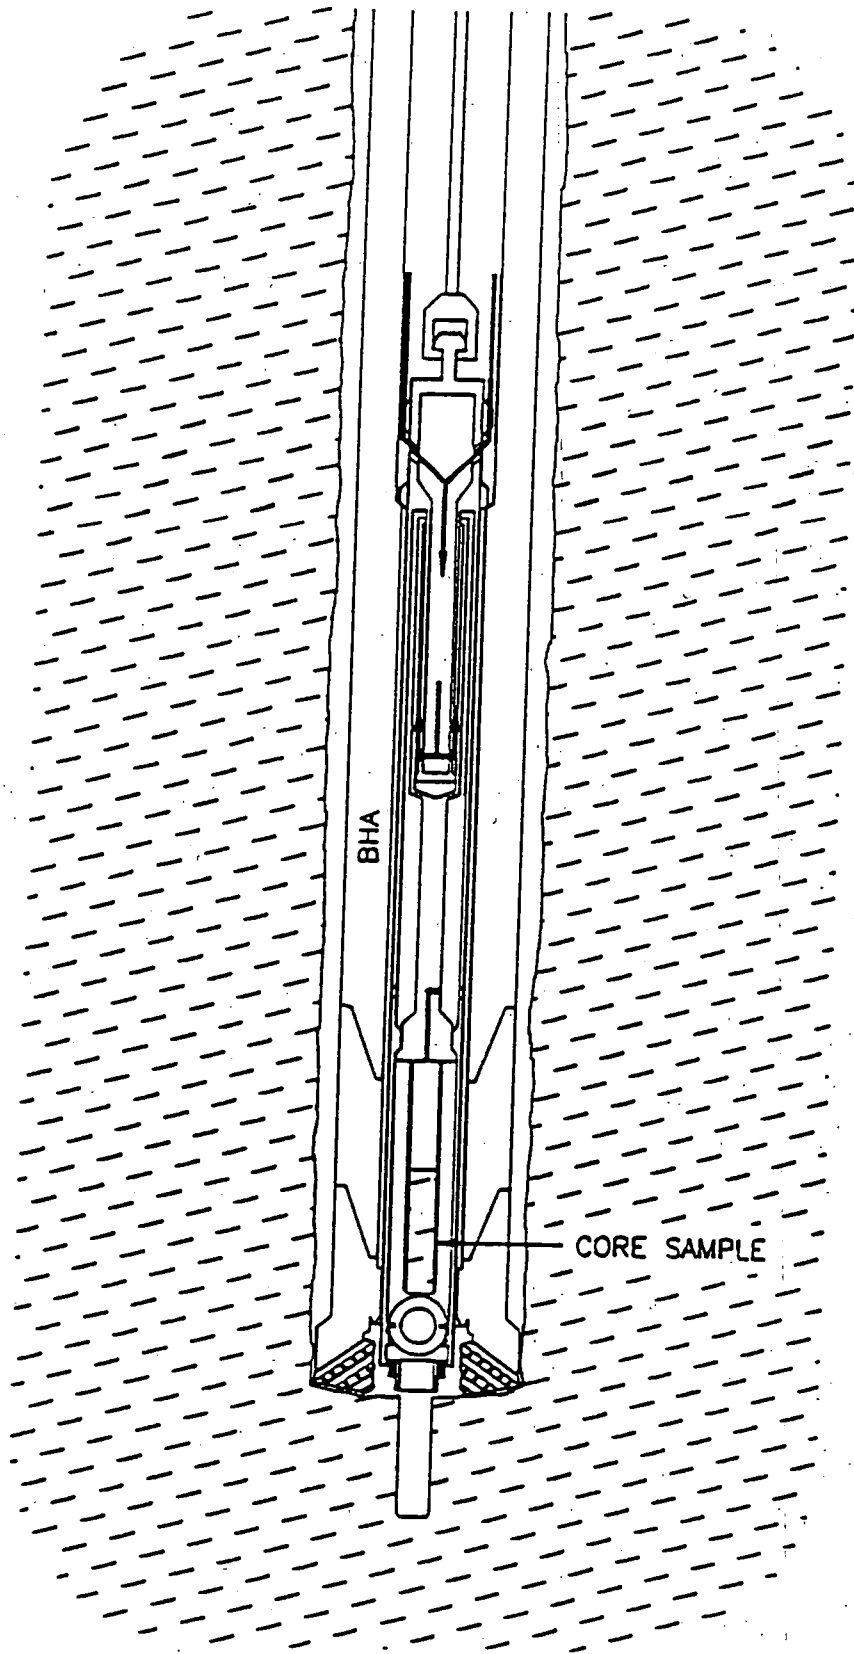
PPCS CORE TUBE RETRACTED AND BALL VALVE CLOSED
